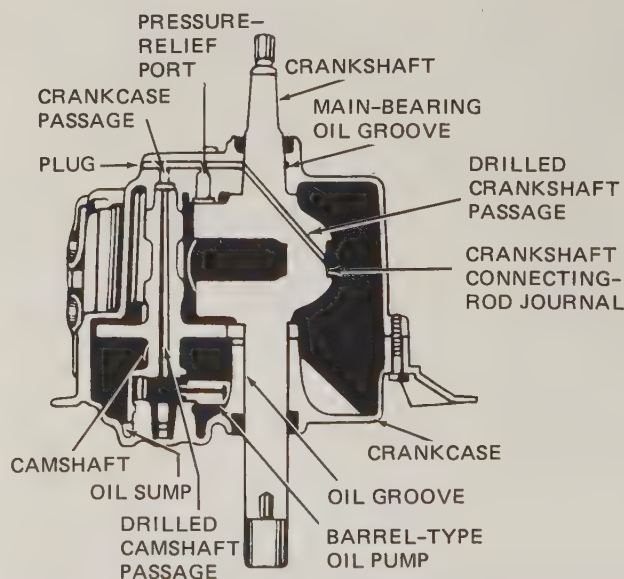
Location of the barrel-type lubricating pump and the oil passages in the engine. (Tecumseh Products Company)
